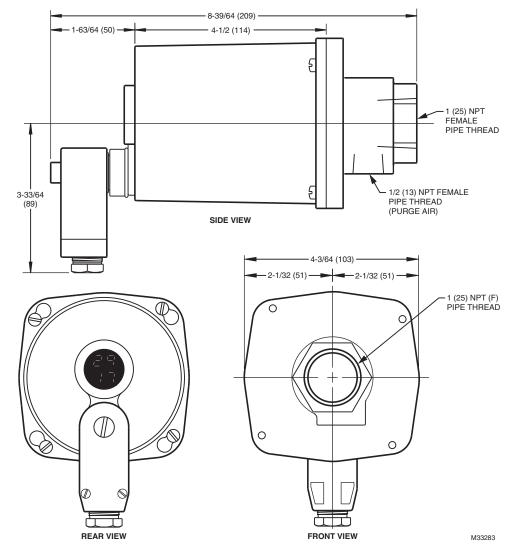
S550B, S552B and S556B dimensions in in. (mm).
